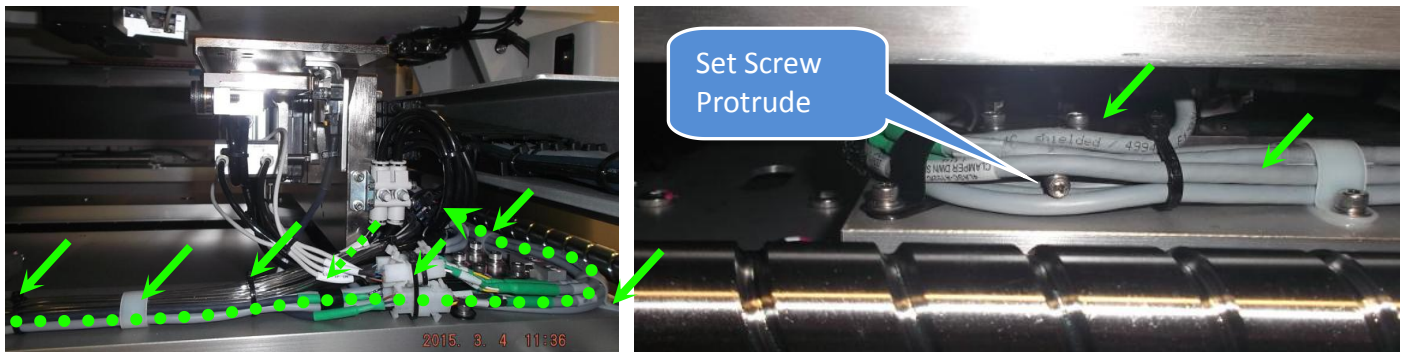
Stepper Motor Cable Routing (Fix Rail)
